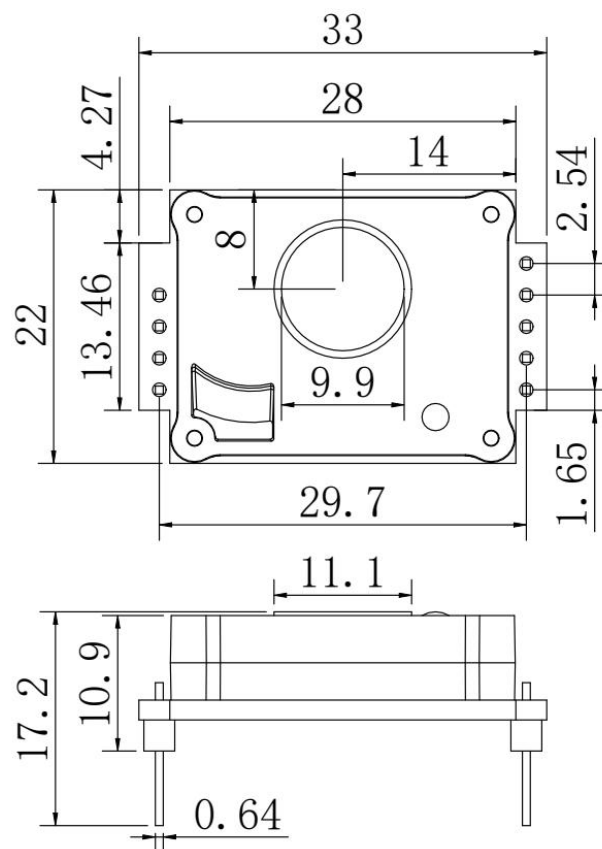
ACD1200 dimension(unit:mm; tolerance: ± 0.5 mm)
